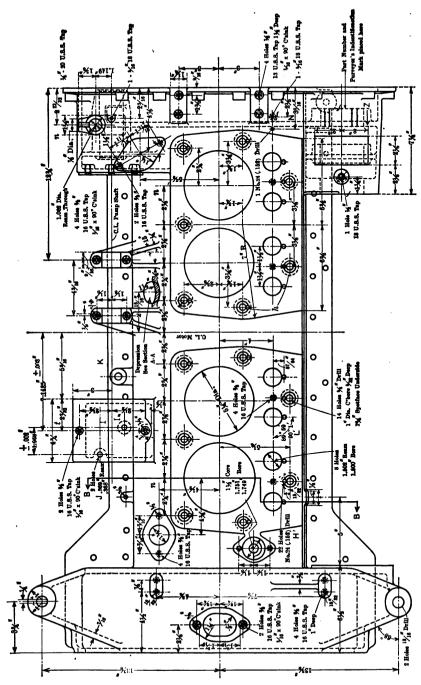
Plan view of upper half of crankcase of Class B military truck engine.
